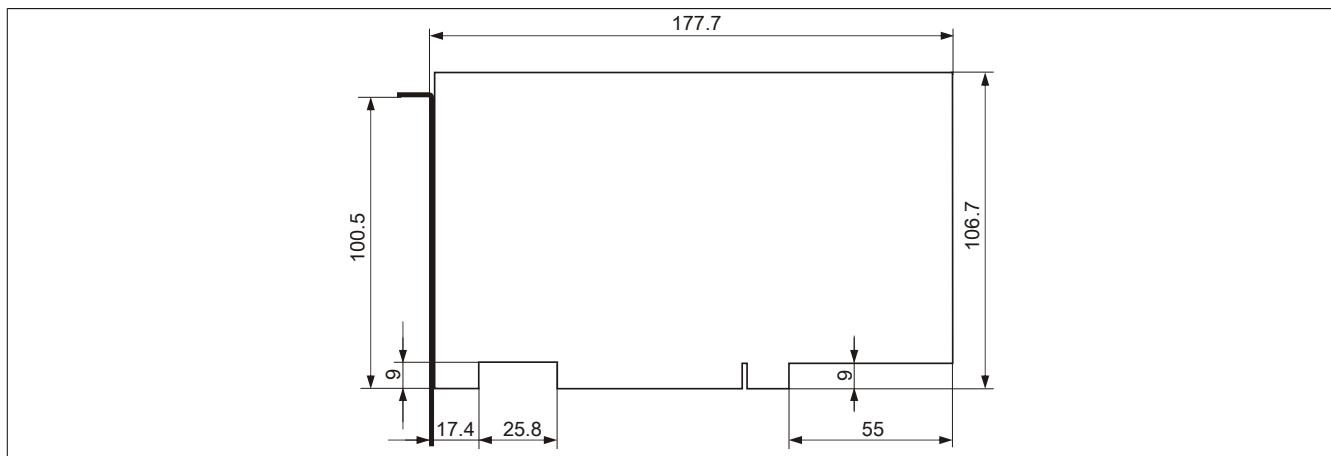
Dimensions - Standard half-size 32-bit PCI card
